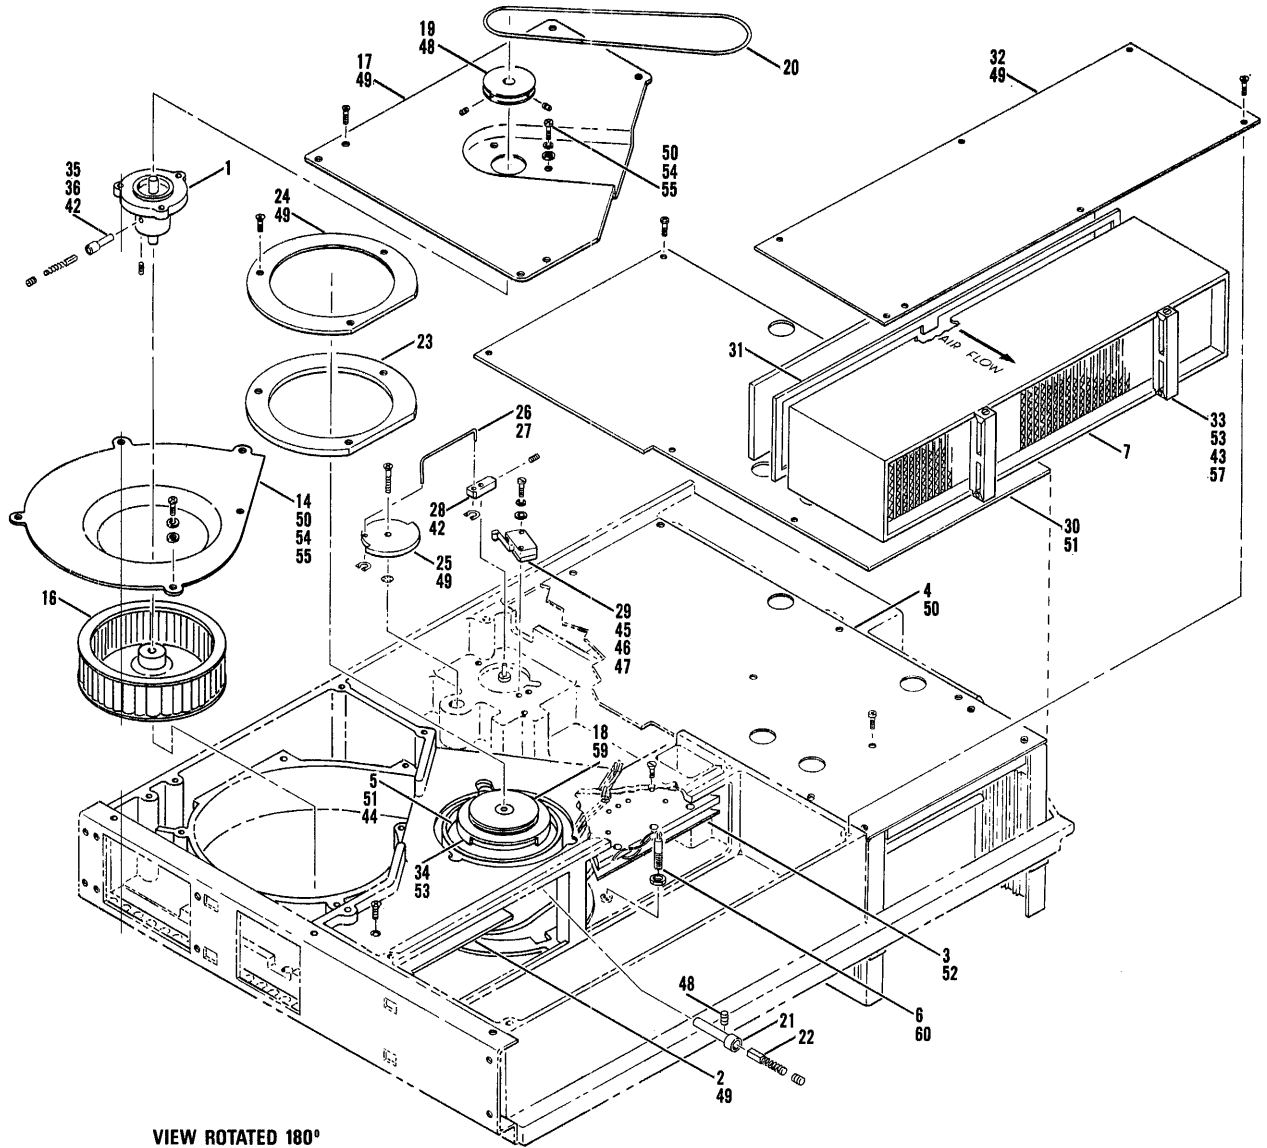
100/200 TPI Disc Drive – Bottom View
